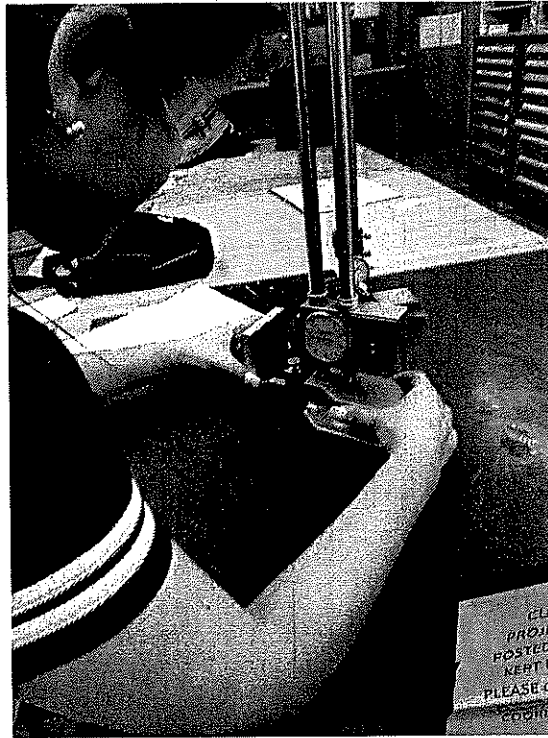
The scribe being used to mark surface of plate. Holes will be drilled where lines intersect.
